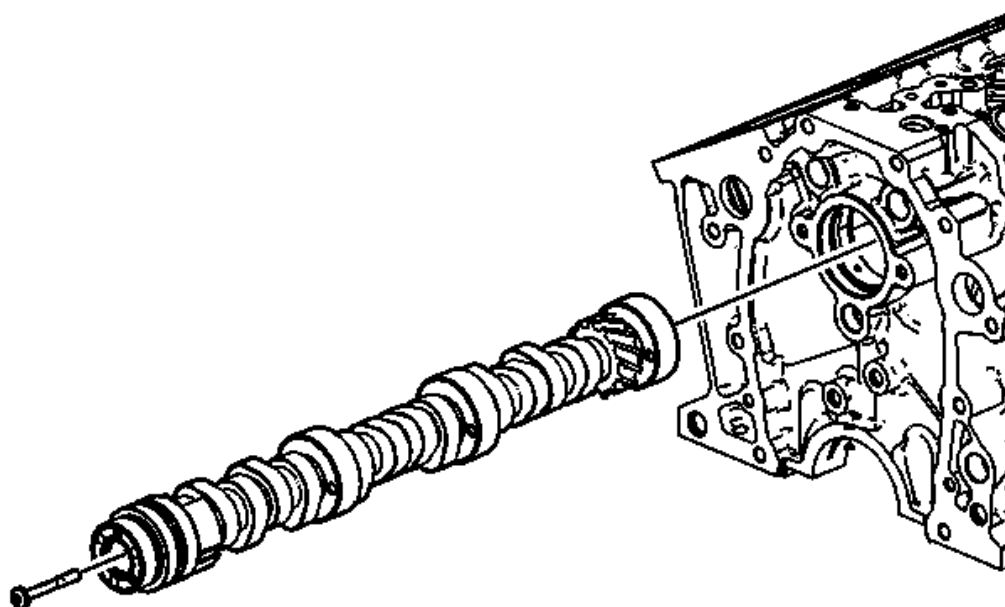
Identifying Camshaft & Camshaft Sprocket Bolt
